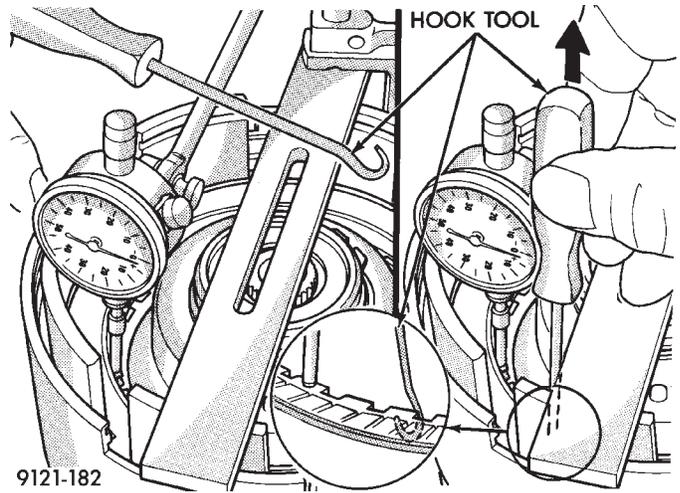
Use Hook Tool to Raise One Clutch Disc
